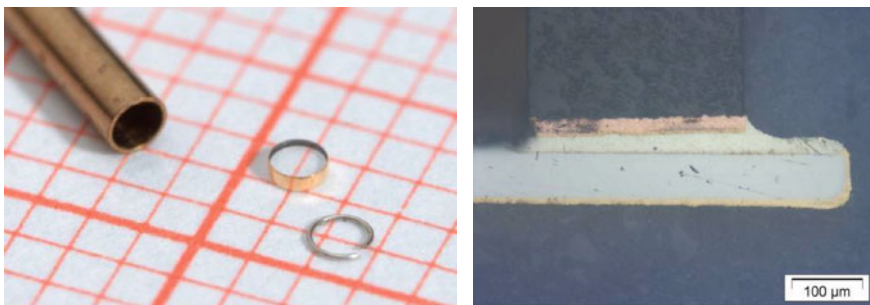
Joining components: bushing, sapphire optics, solder preform (left). Cross section of a soldering joint (right)
